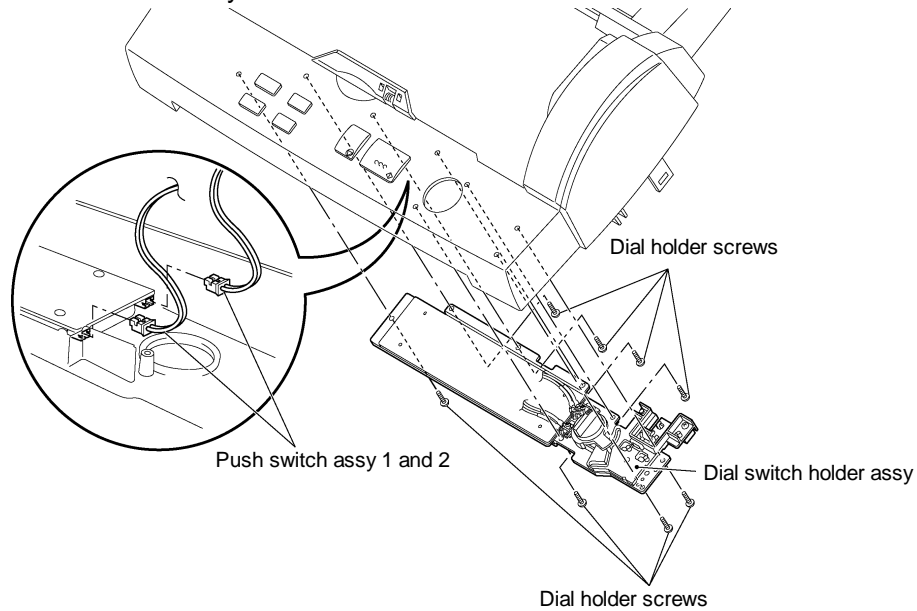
Removing the Dial Switch Holder Assy
